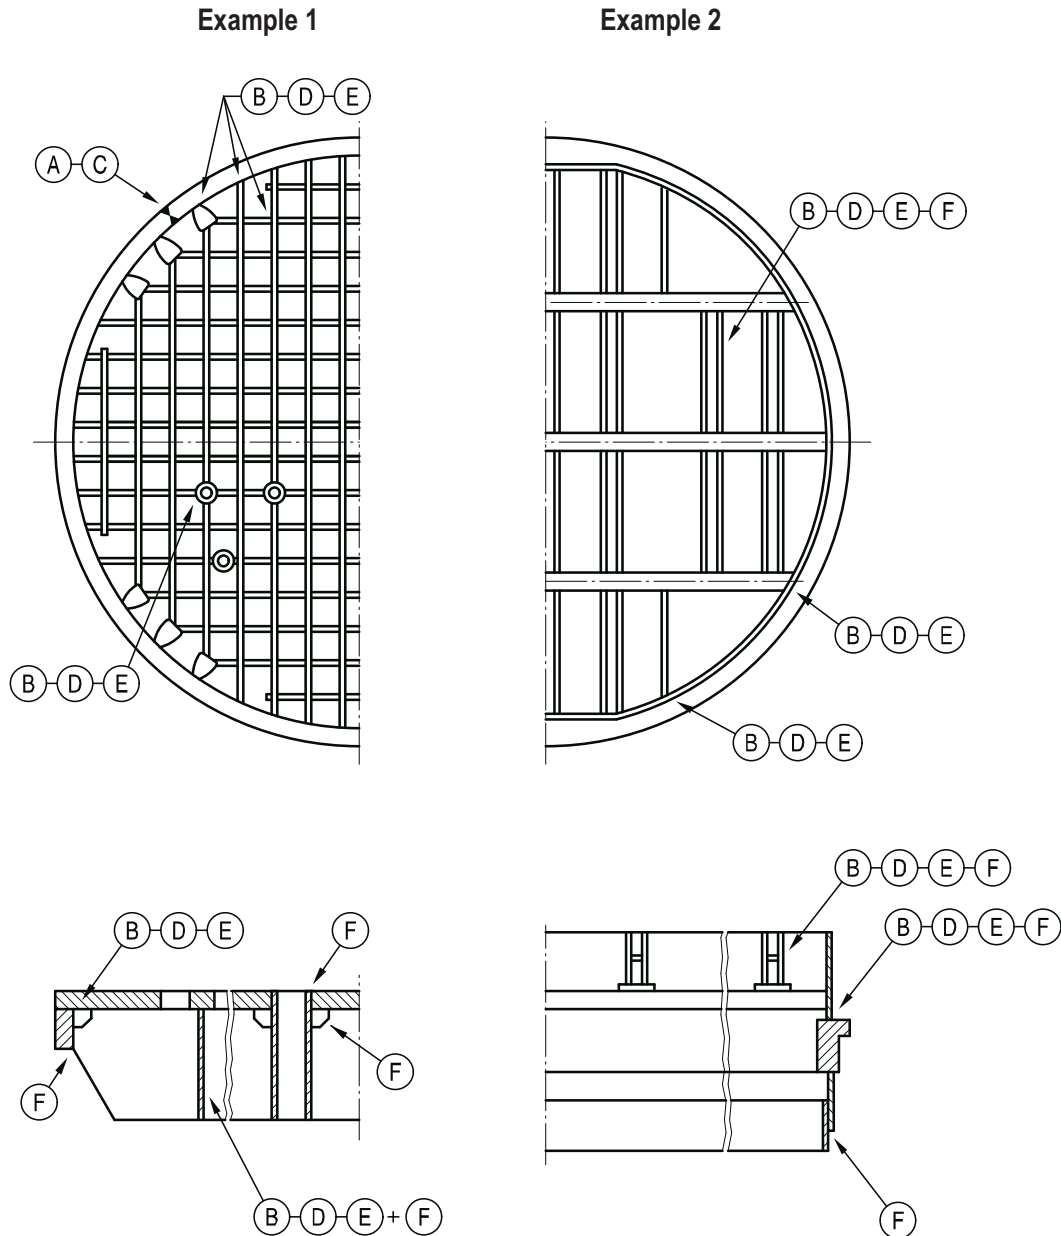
Typical weld type locations of welded joint category A to F (see section 6.1.6 and Table 8-3)
